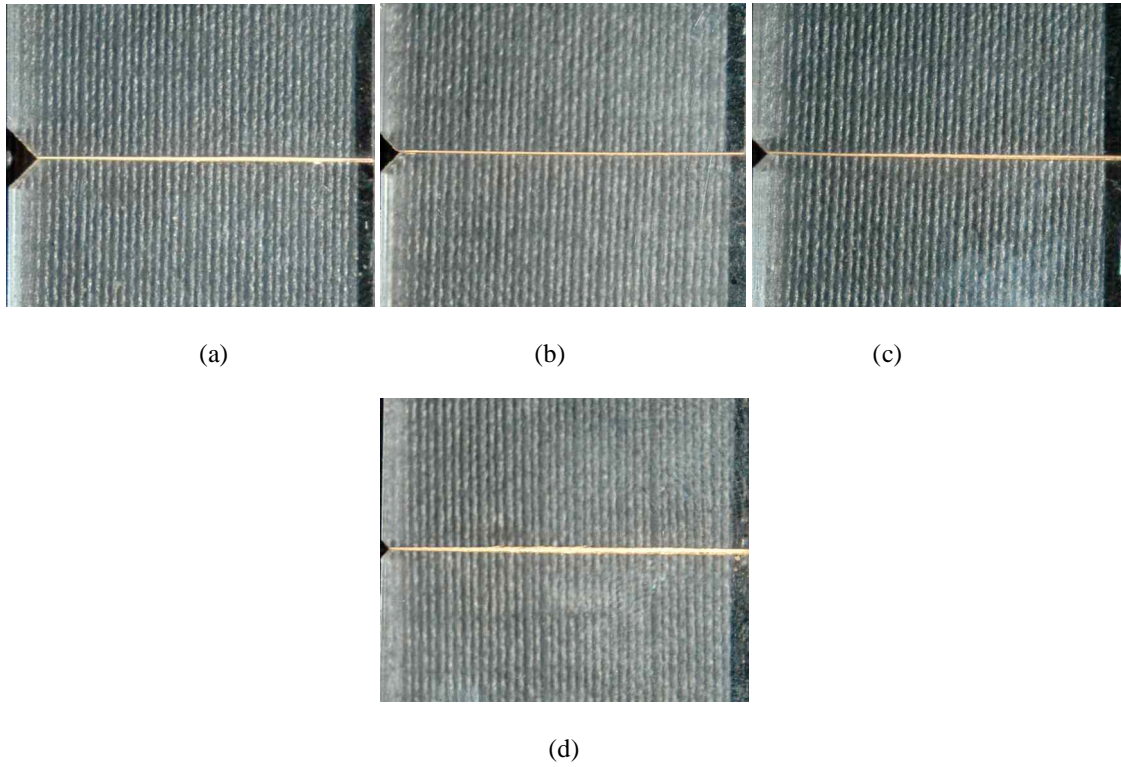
Macroscopically planar fracture surfaces for the specimens containing the (a) 2.0 mm, (b) 1.4 mm, (c) 1.0 mm, and (d) 0.5 mm notches.
